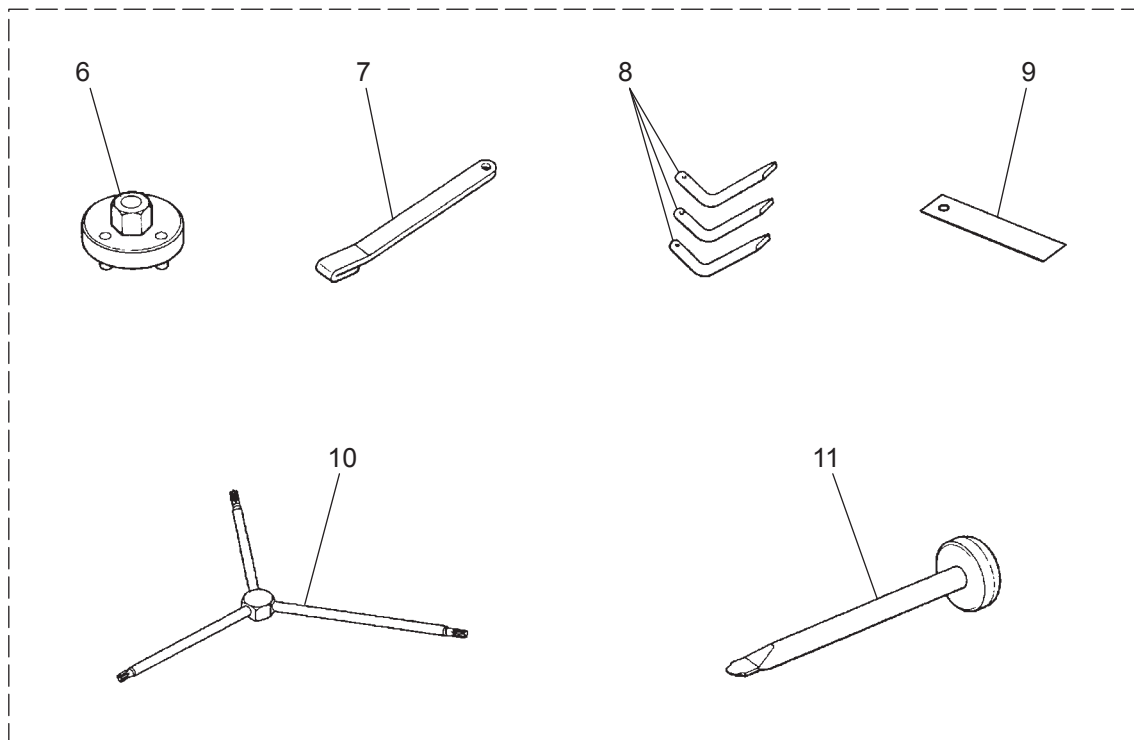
G3802 / G3802EZ ACCESSORIES and SPECIAL TOOLS
